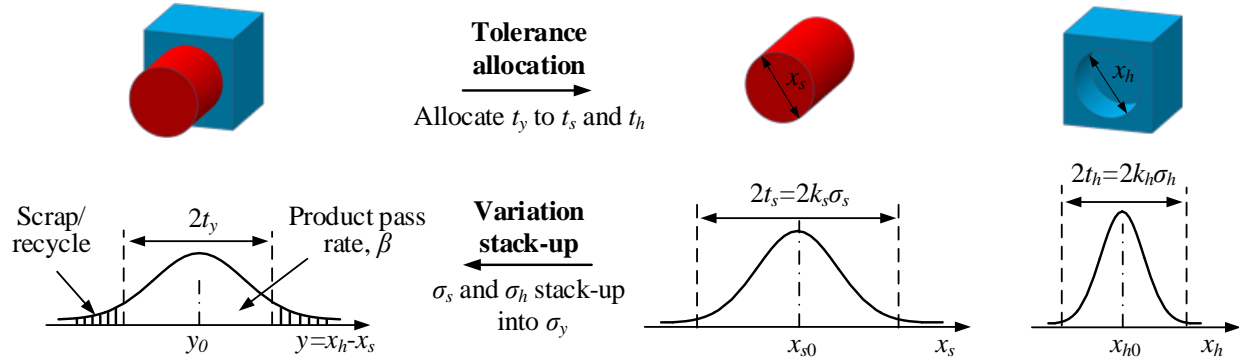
A shaft and hole tolerance allocation example.
